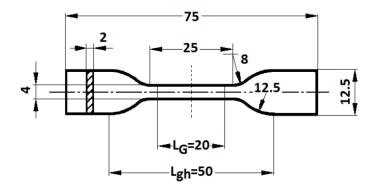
Dimensions (mm) of the ISO 527 - 2 - 5A Specimen. (58)
